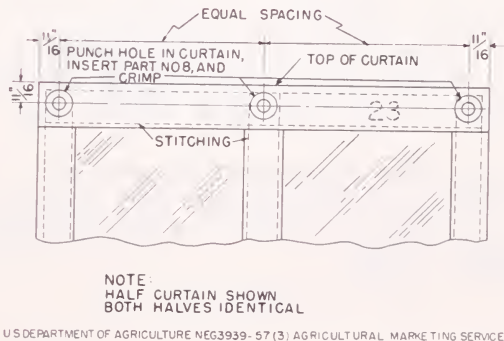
Assembly of part No. 8 to curtain for a 30" x 64" door opening.
